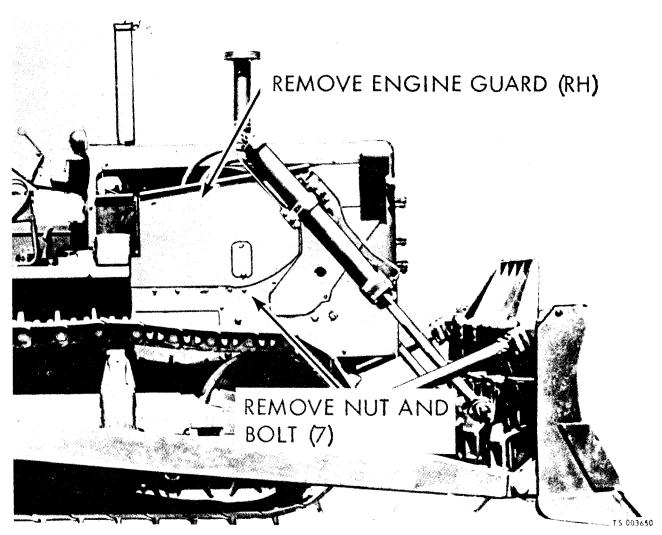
Engine upper guard assemblies, removal and installation (sheet 2 of 3).
